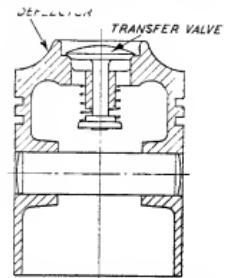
An automatic transfer valve fitted to the piston head of a two-stroke engine.
